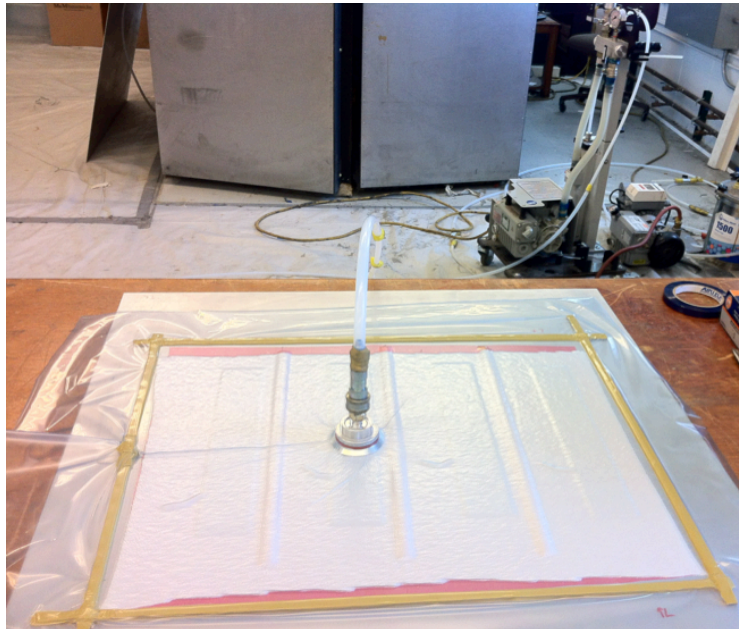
Manufacturing set up before the mold was kept inside the oven.
